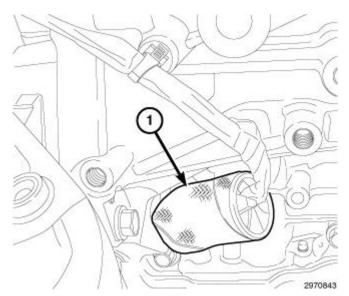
Crankshaft Position (CKP) Sensor Heat Shield Courtesy of CHRYSLER GROUP, LLC
